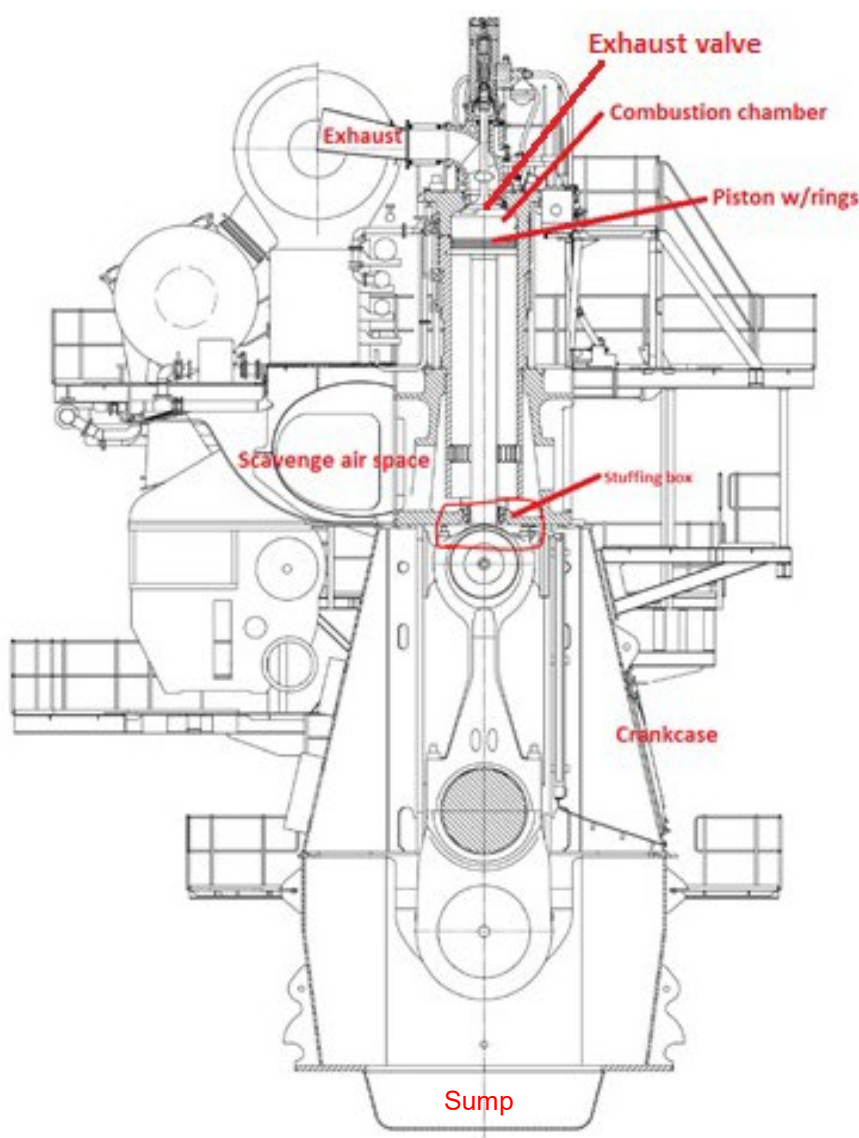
Engine cross section, turbocharger(s) mounted on the exhaust side
